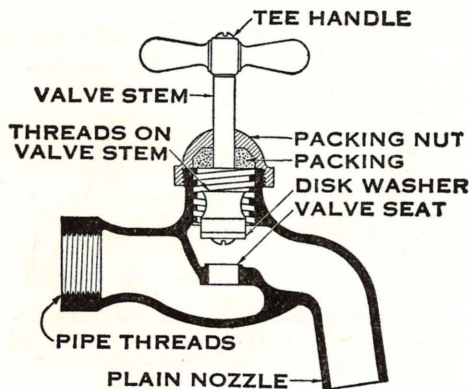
The section view of a compression faucet showing the working parts. Valve open
